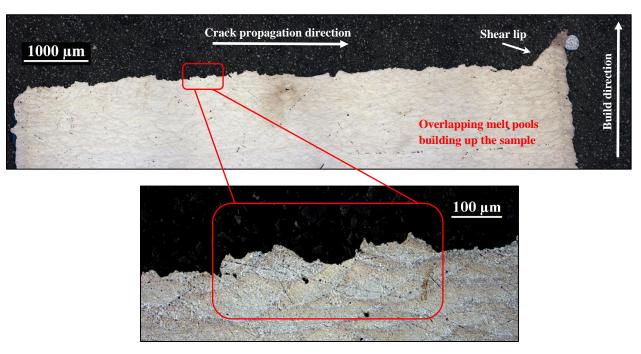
Cross-sectional view of the fracture surface of a tensile sample demonstrating crack propagation along melt pool boundaries.
